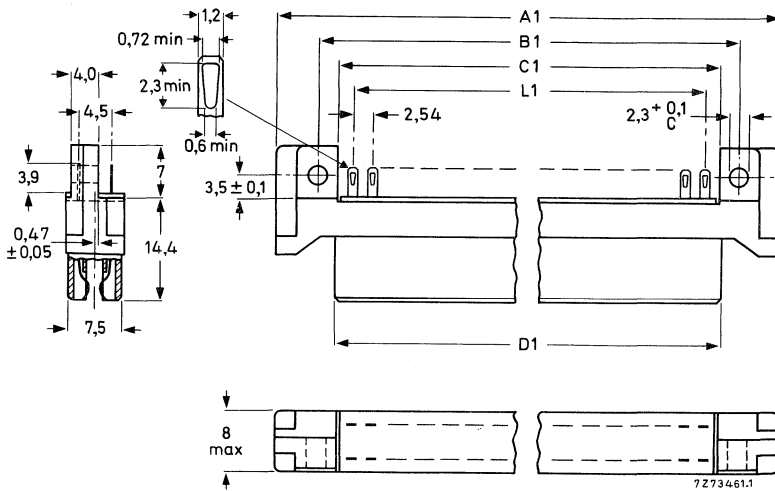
Female part with solder tags with eyelet; see Table 2 for dimensions A1, B1, C1, D1 and L1.
